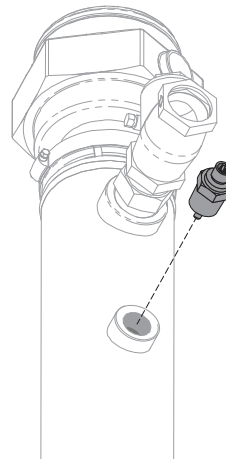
High-limit RTD plug shown removed from OCLP heating tank.
